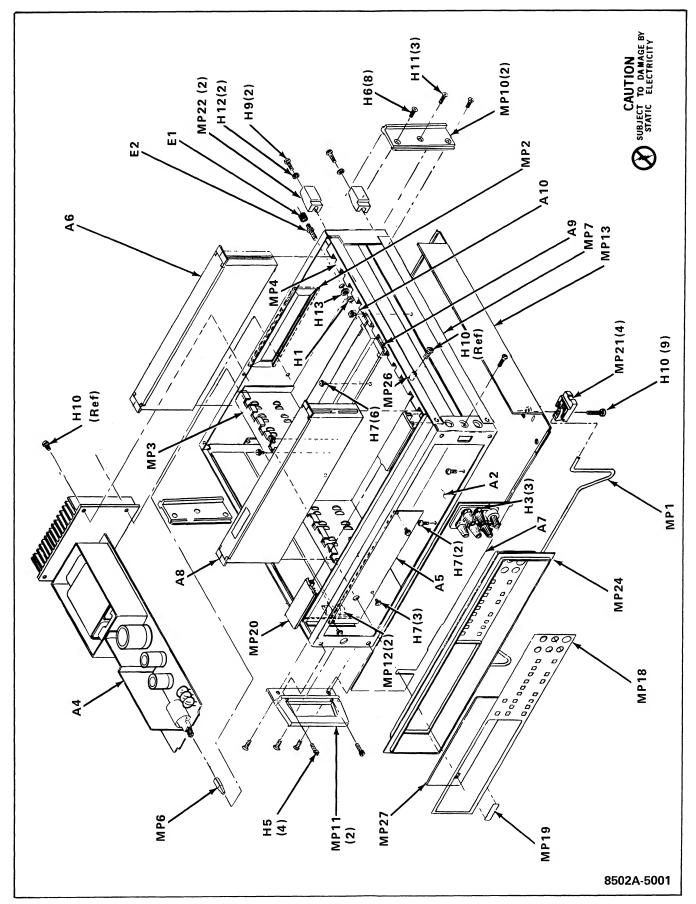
Final Assembly 15 Inch Pack (cont)
